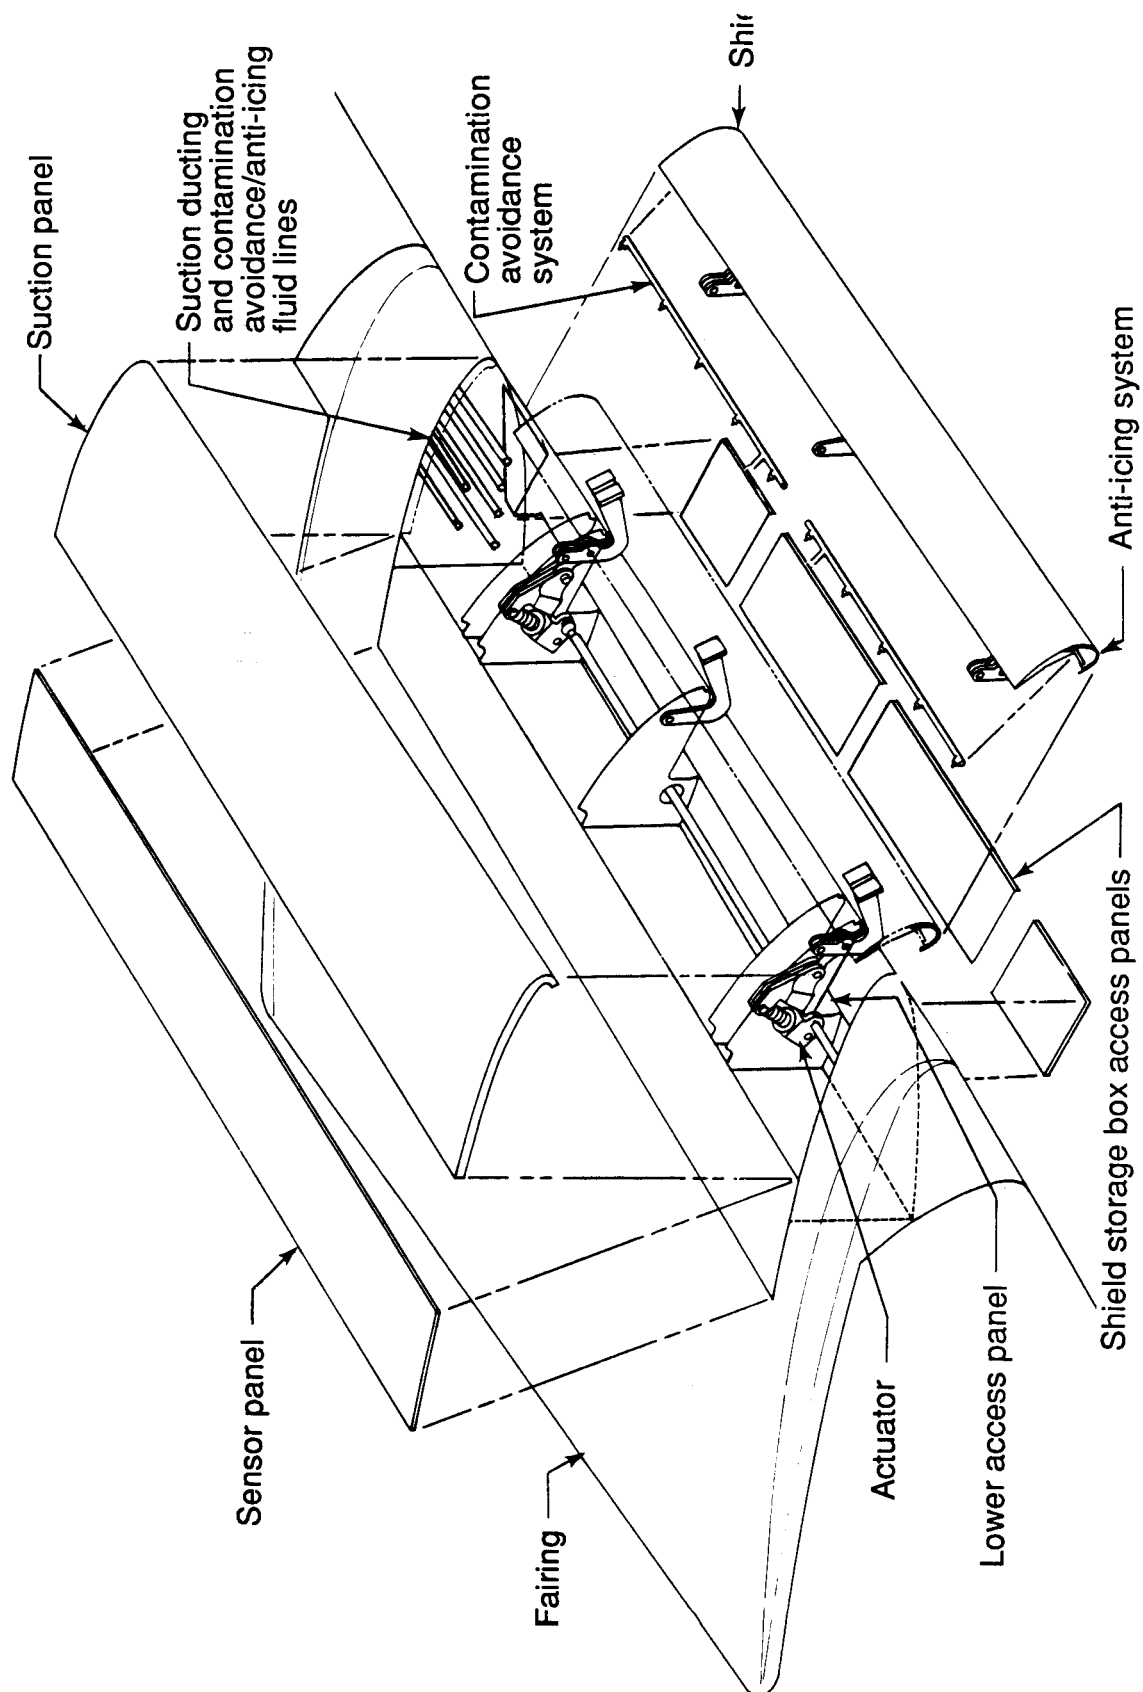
Exploded view of principal components of perforated-surface leading-edge test article.
